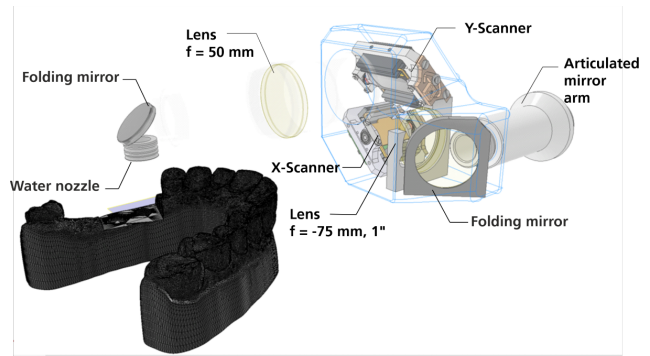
CAD view of the handpiece showing the placement of the optics, planar galvanometer scanners and water spray nozzle within a compact housing.
